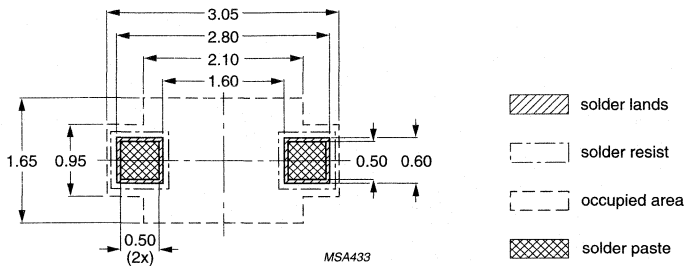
Reflow soldering footprint for SOD323 (SC-76).
